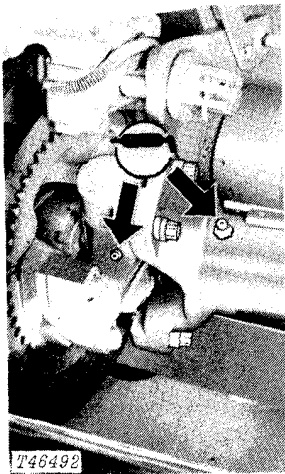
Front Lower Telescoping Universal Joint (2 Points)
